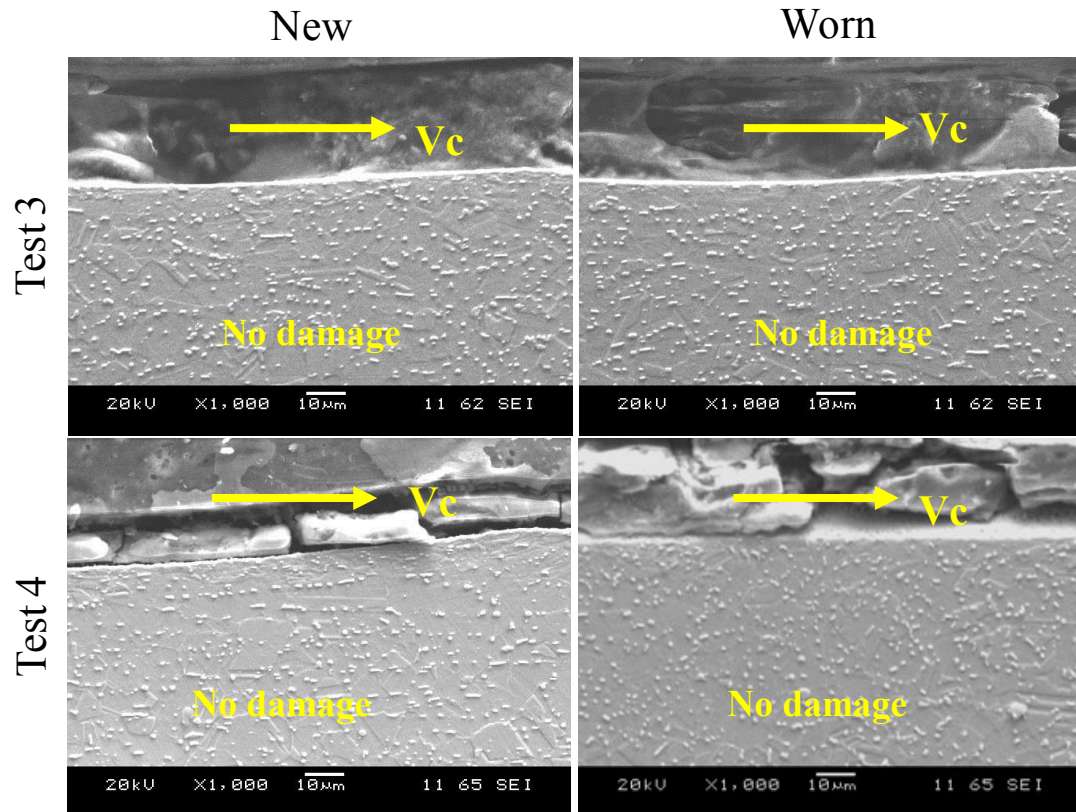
Cross sectional SEM images of machined workpiece sub-surface of Tests 3 and 4 in a direction perpendicular to feed
